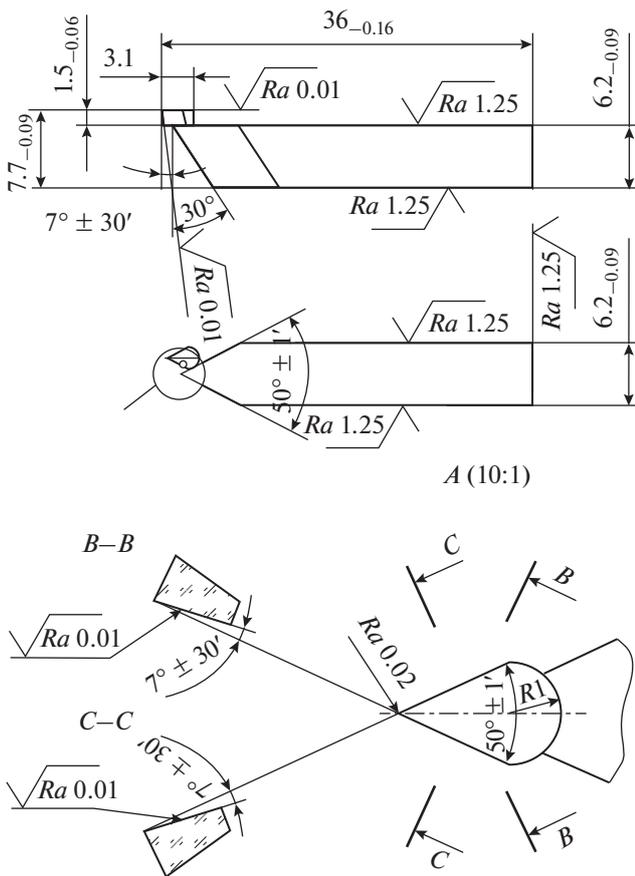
Diamond cutter for machining a negative Fresnel matrix.
